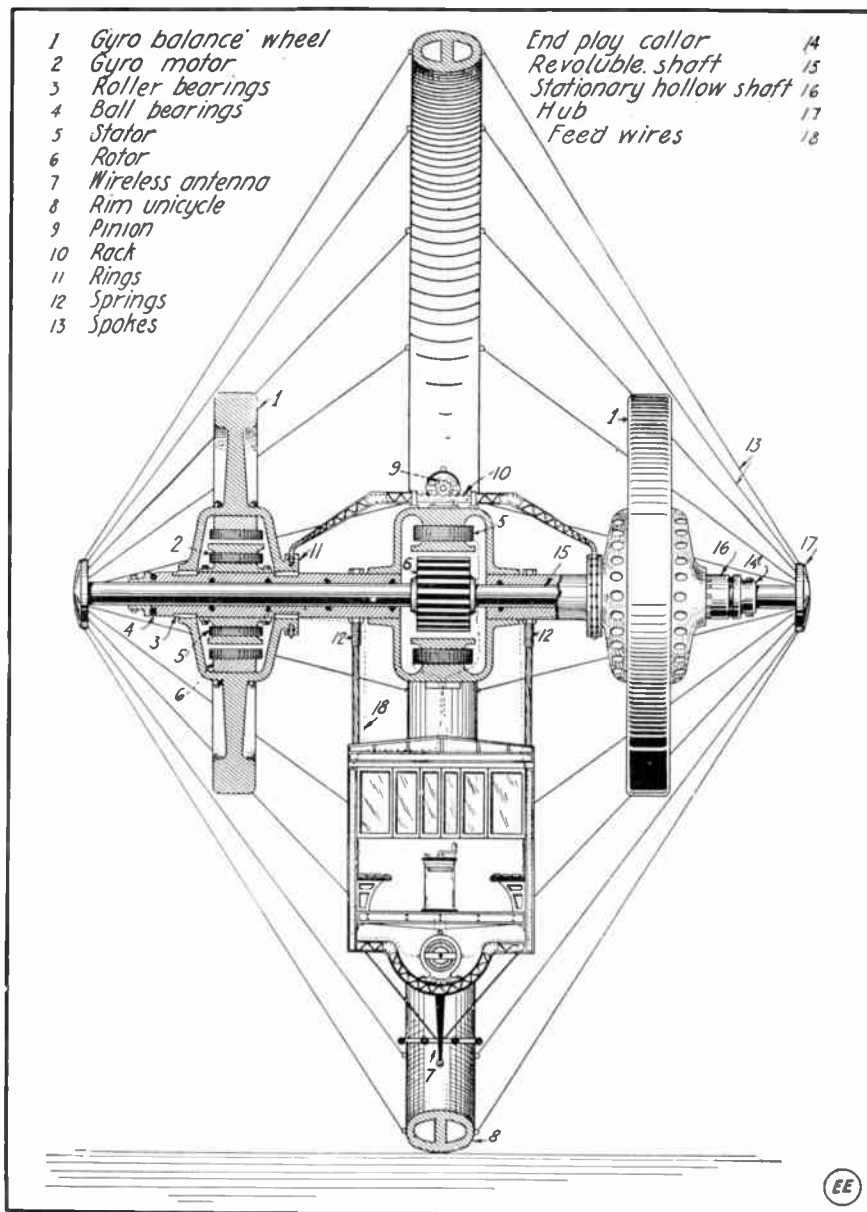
A Giant Unicycle Land Flyer Utilizing Two Powerful Motor-Driven Gyroscopes to Maintain Its Equilibrium. The Unicycle Propelling Motor is Mounted Directly on the Shaft of the Outer Travelling Wheel.
